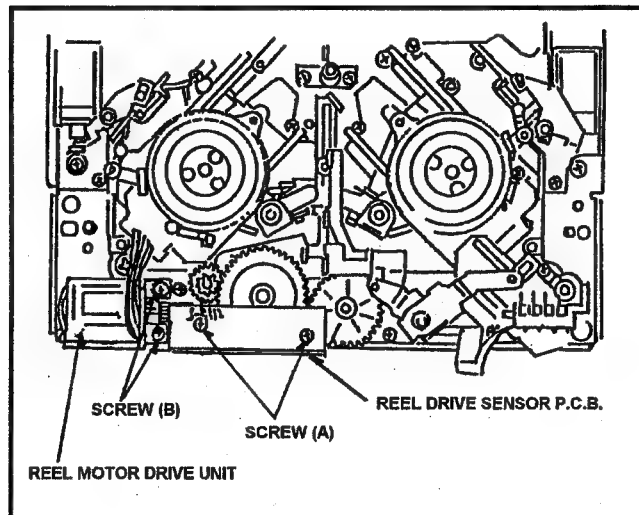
Removal of Reel Drive Motor Unit
